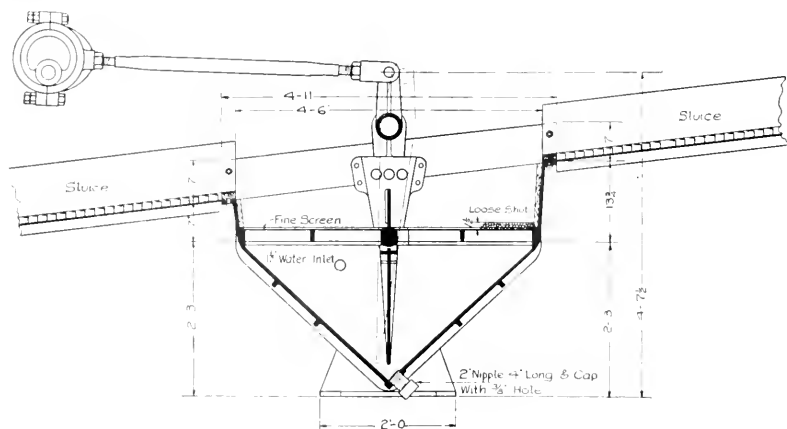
NEILL JIG AND ECCENTRIC DRIVE.
